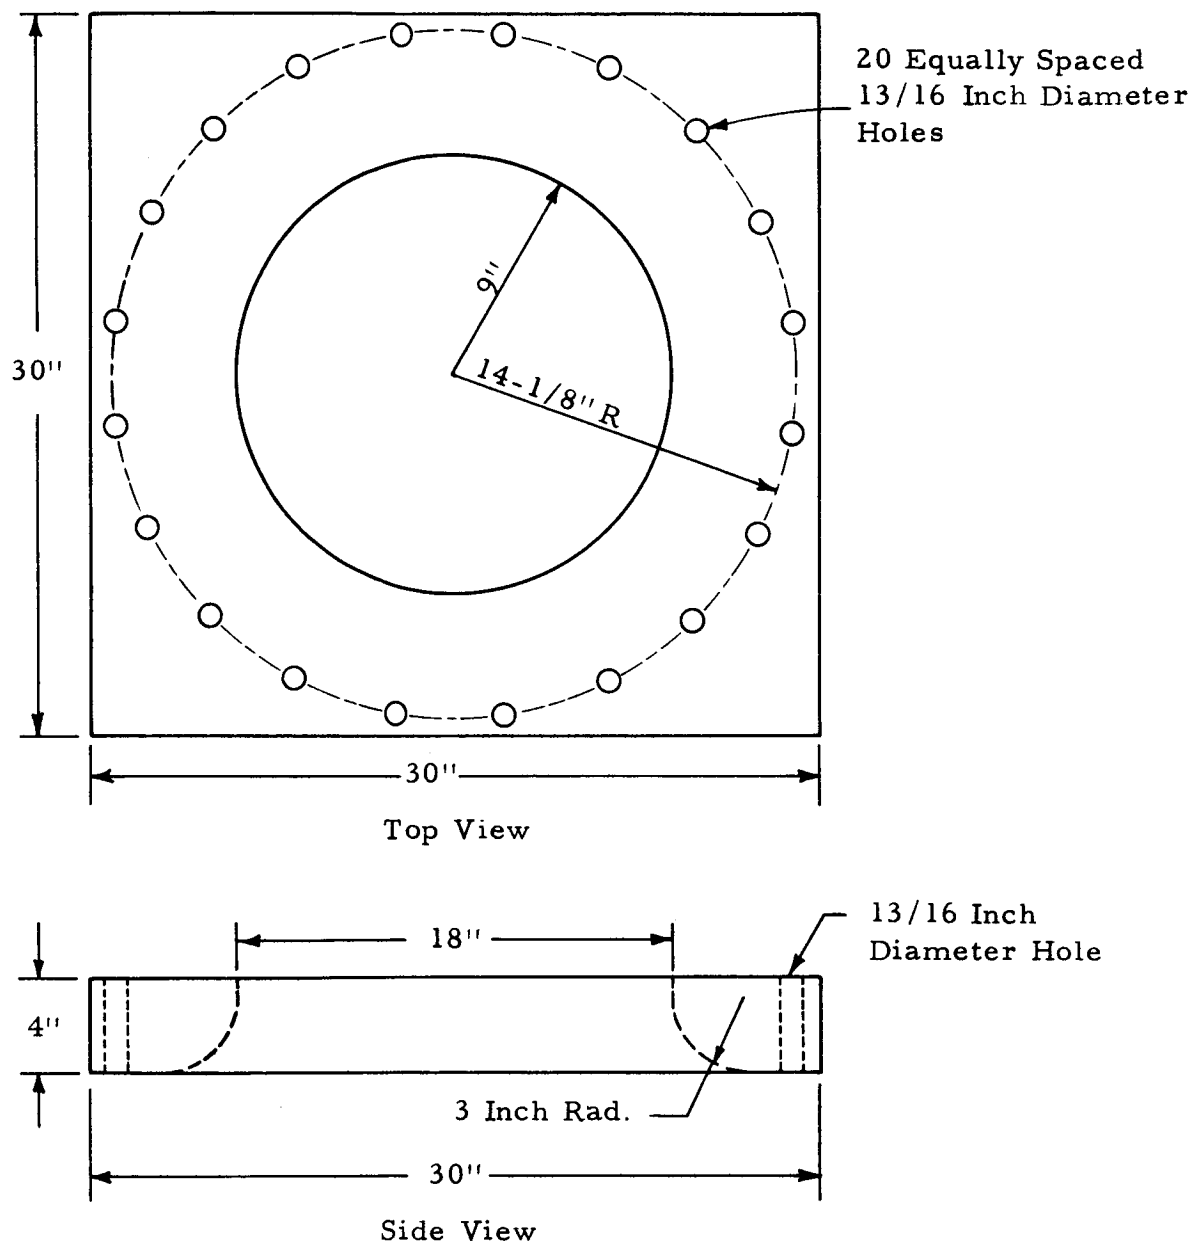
TOP DIE OF HYDRAULIC BULGE FIXTURE
